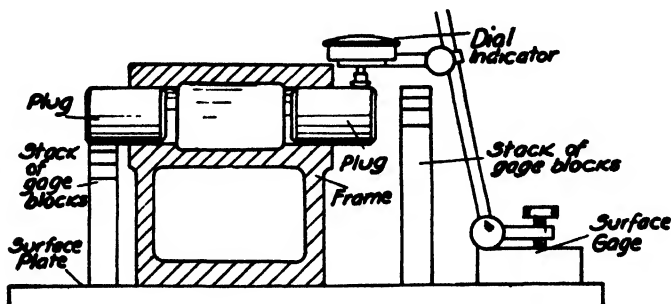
Two methods of Testing the Center Height and Parallelism of the Bearing Hole in a Frame.
